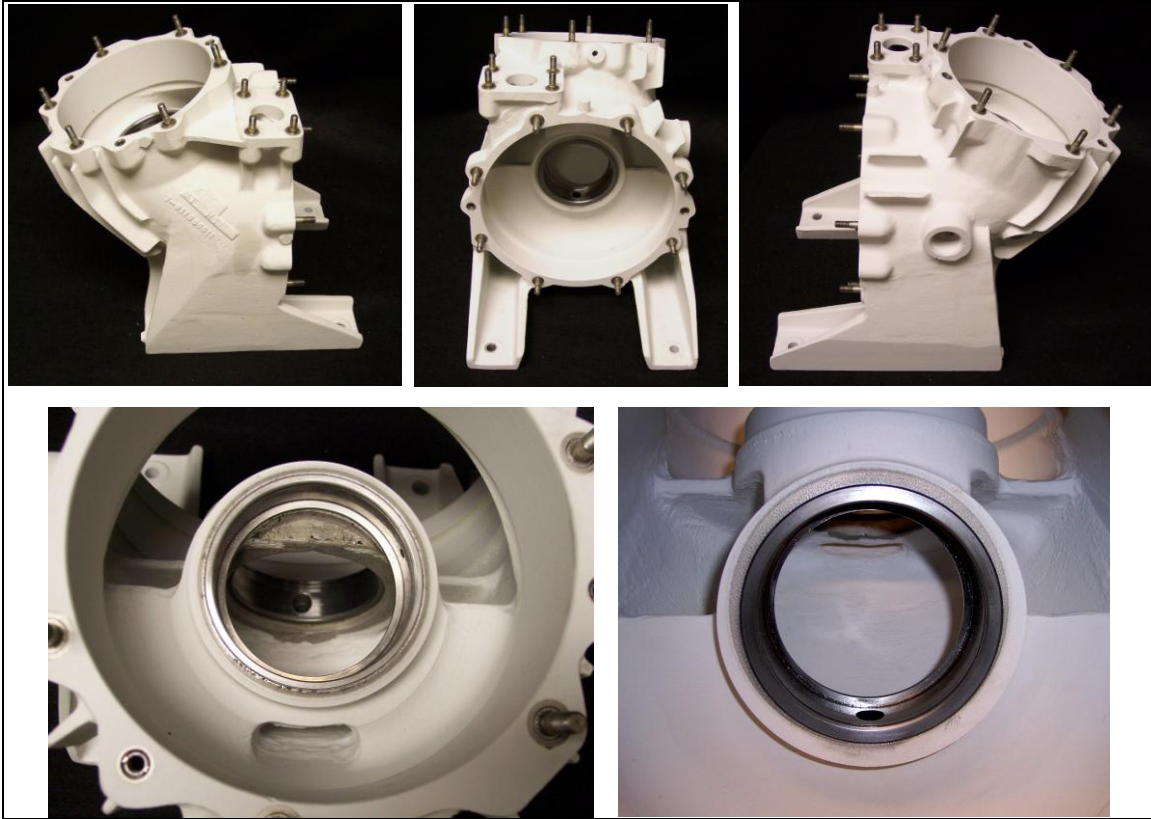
H-64 intermediate gearbox after Immersion Tagnite 8200 and removal of masking tools.
